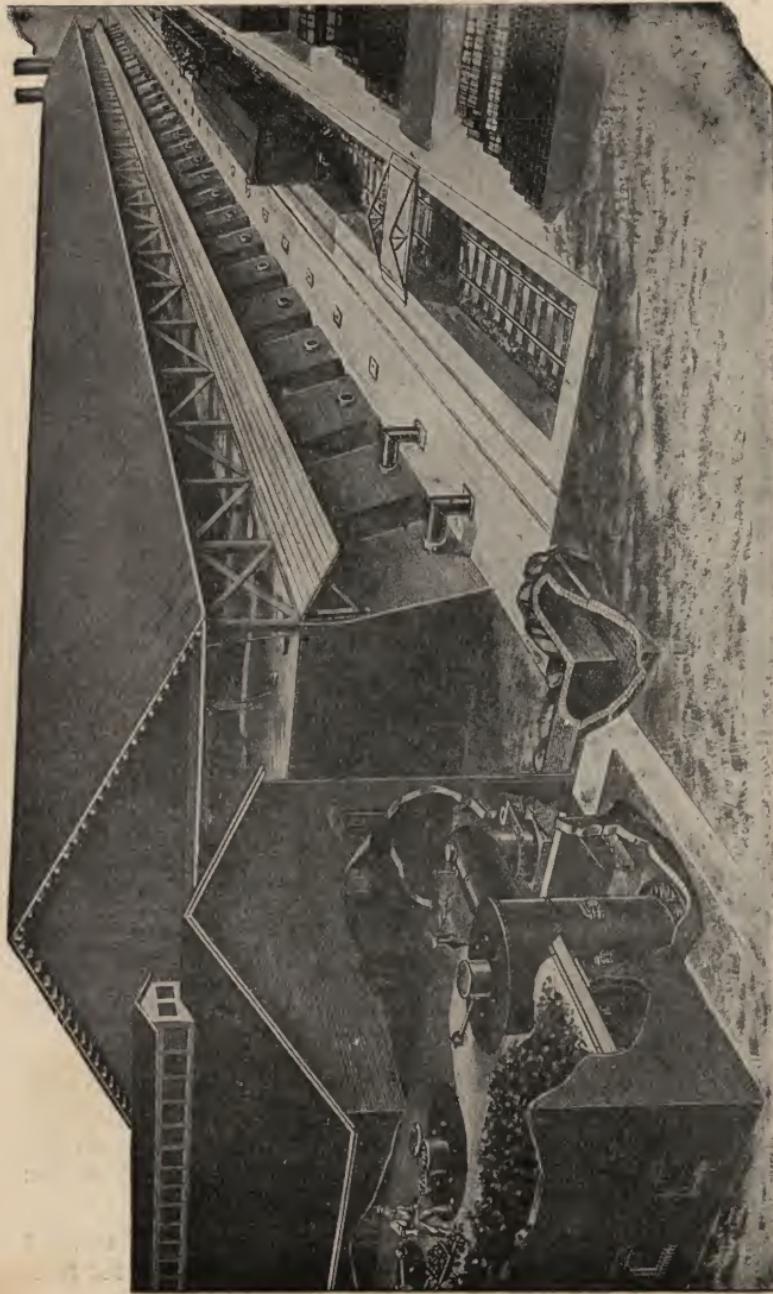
,826.—International continuous kiln. These kilns use less fuel than other types, but are more expensive to build, they being fitted especially for the larger plants. They consist of a series of chambers, the air of combustion being heated up by passing it through chambers filled with hot, burned brick. The burning gases instead of passing direct to the stack are first passed through chambers of green brick, thus practically burning these brick before any direct heat is turned into them. Continuous kilns are used for the burning of brick, tile, hollow ware, and fire brick. Fuel used, fine coal fired direct, or producer gas made from coal.
